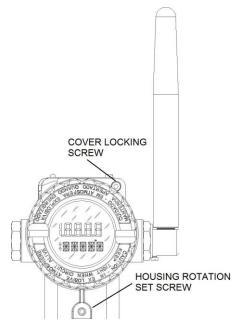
Cover Locking and Housing Rotating Set Screw
